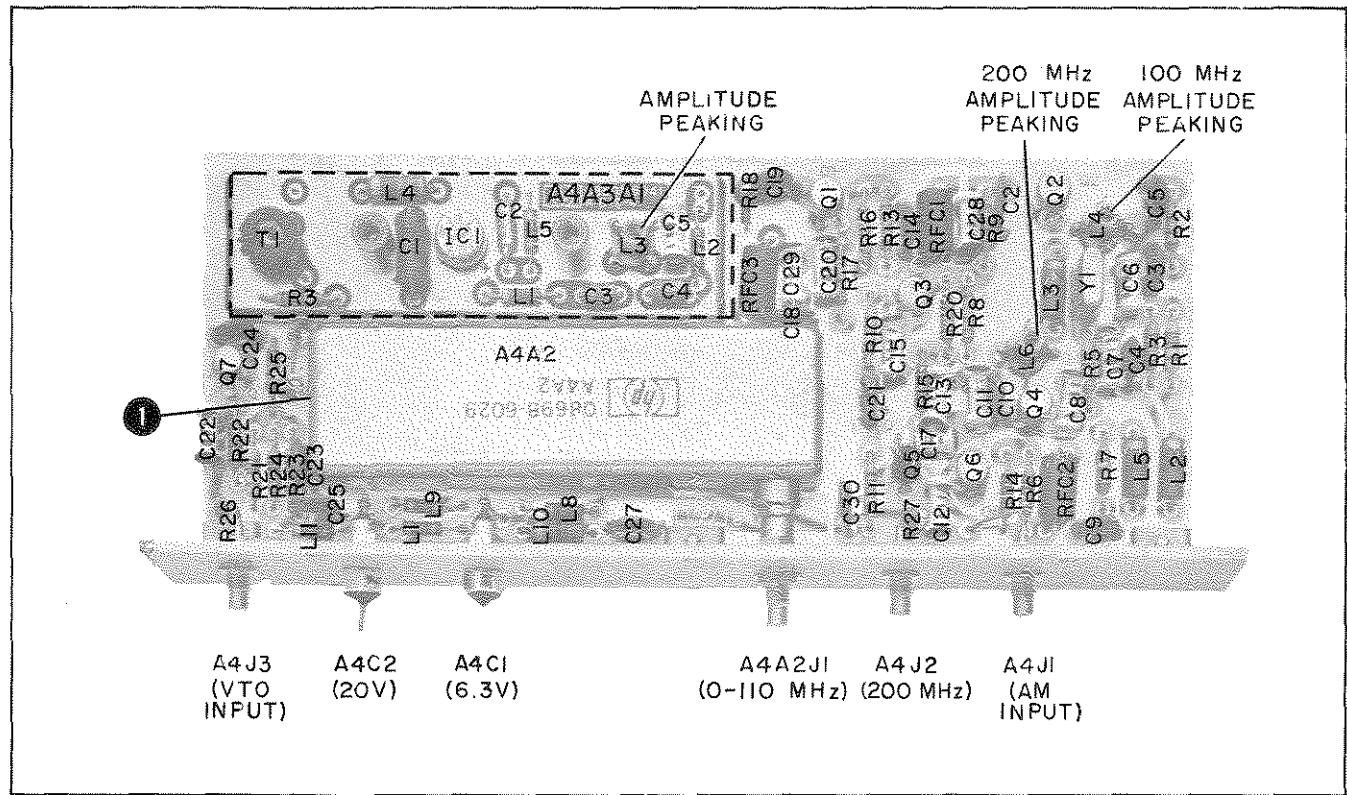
Component Identification, A4A1 Crystal Oscillator Assembly
